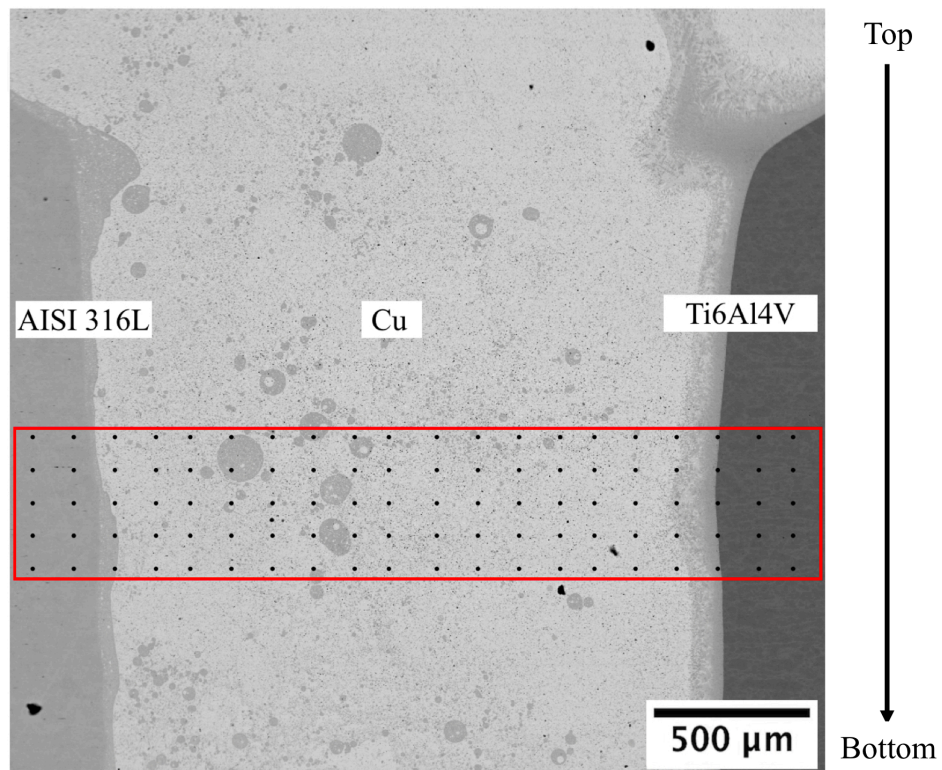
Location of the microhardness measurements across a weld cross section in the dissimilar welding.
